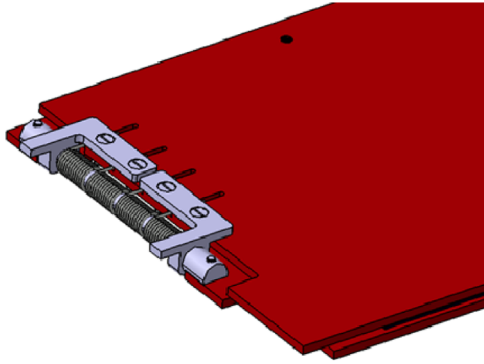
Secondary hinge mounted on the solar panels in stowed configuration.
